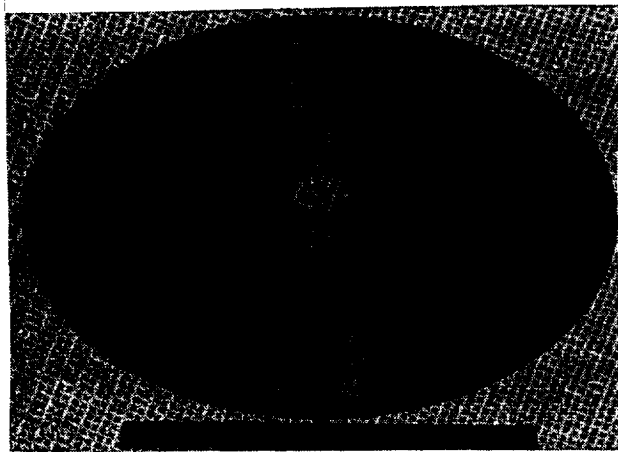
A 46 Grit Diamond Impregnated Cutoff Blade, 25 cm (10 inches) in Diameter (119338B)
